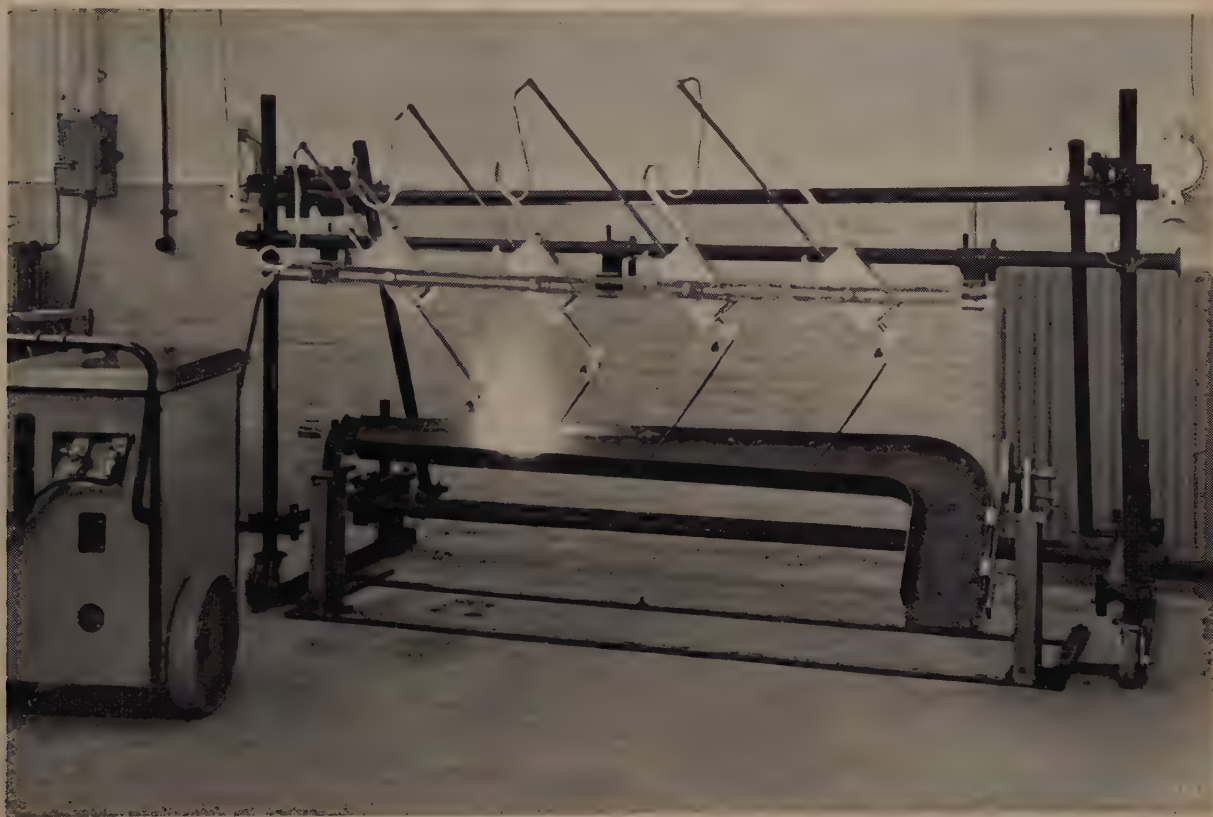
The Contact automatic welder at work. The electrode of the first welding head has been consumed and the bar drawn up. Welding is being continued with the second welding head.
